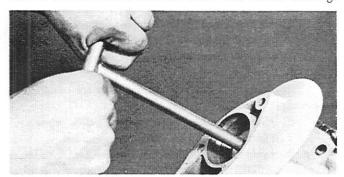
Inserting Assembler Shaft & Water Pump Assembly
